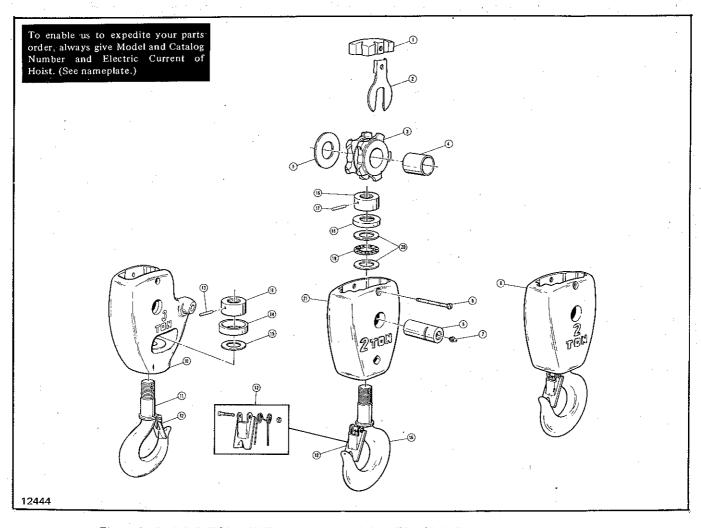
2 & 3 TON LOWER BLOCK ASSEMBLIES (Coil Chain Model Hoists)
